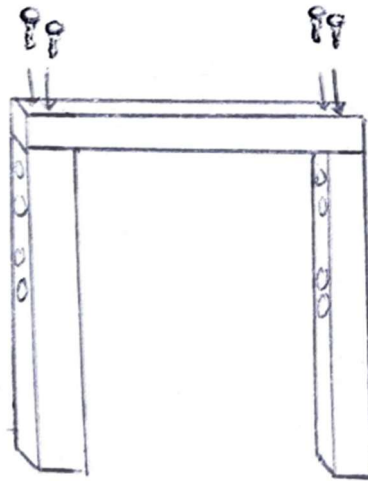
Attaching screws to connect first parts of the frame subsystem.
